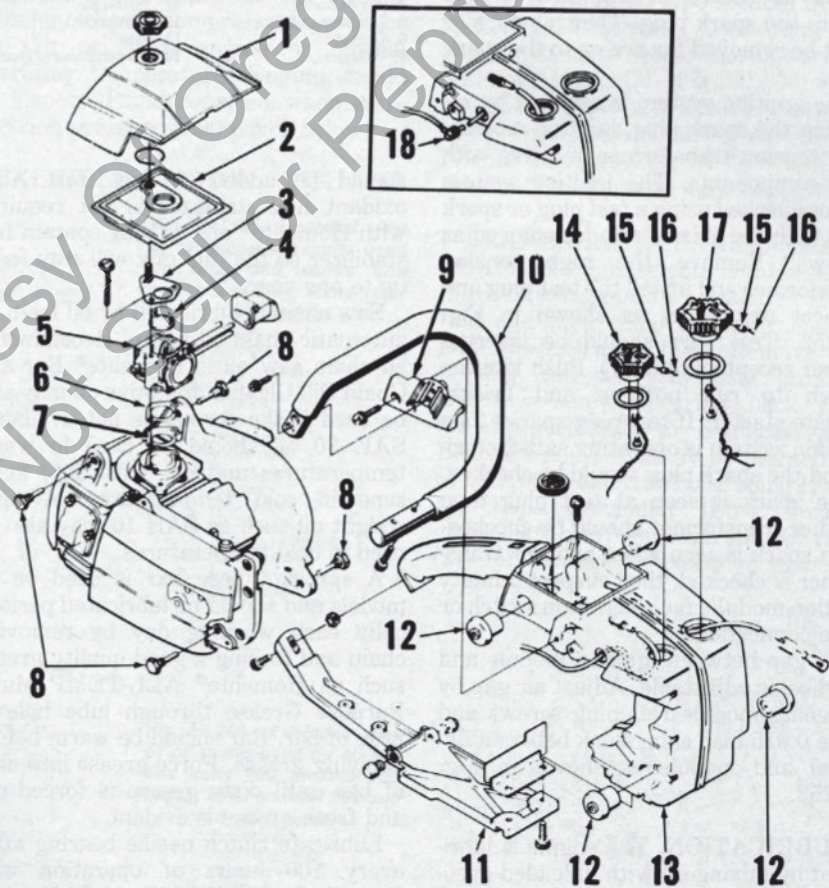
Exploded view of engine housing assembly. Some housings will use a threaded elbow fitting (18) on oil pickup tube as shown in inset.
